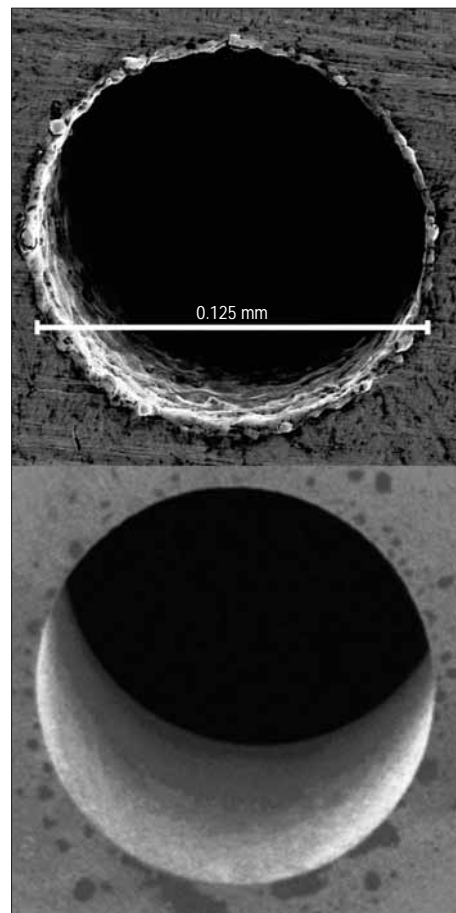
Bore normal: eroded surface (top), after MBS machining (bottom)
